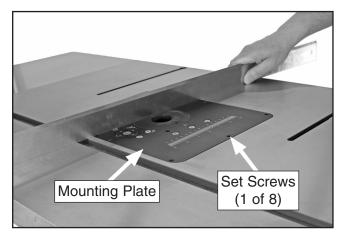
Example of using a straightedge to align mounting plate with table surface.
